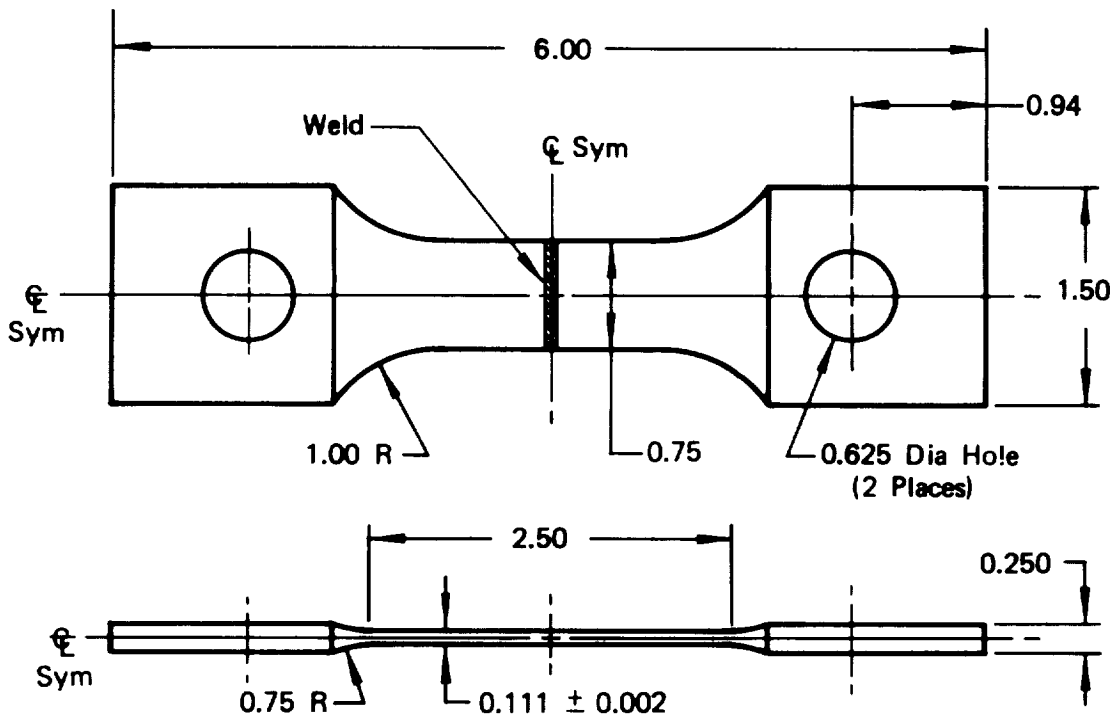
WELDMENT TENSILE SPECIMEN (PART I)
